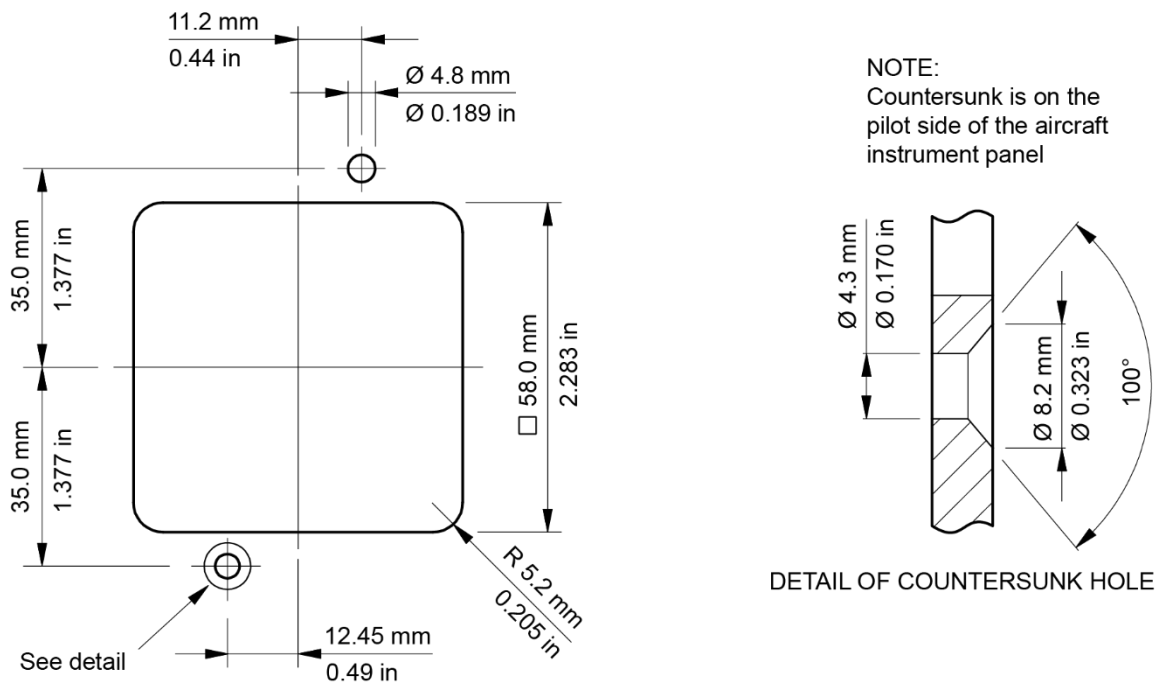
Hole Dimensions in Aircraft Instrument Panel
